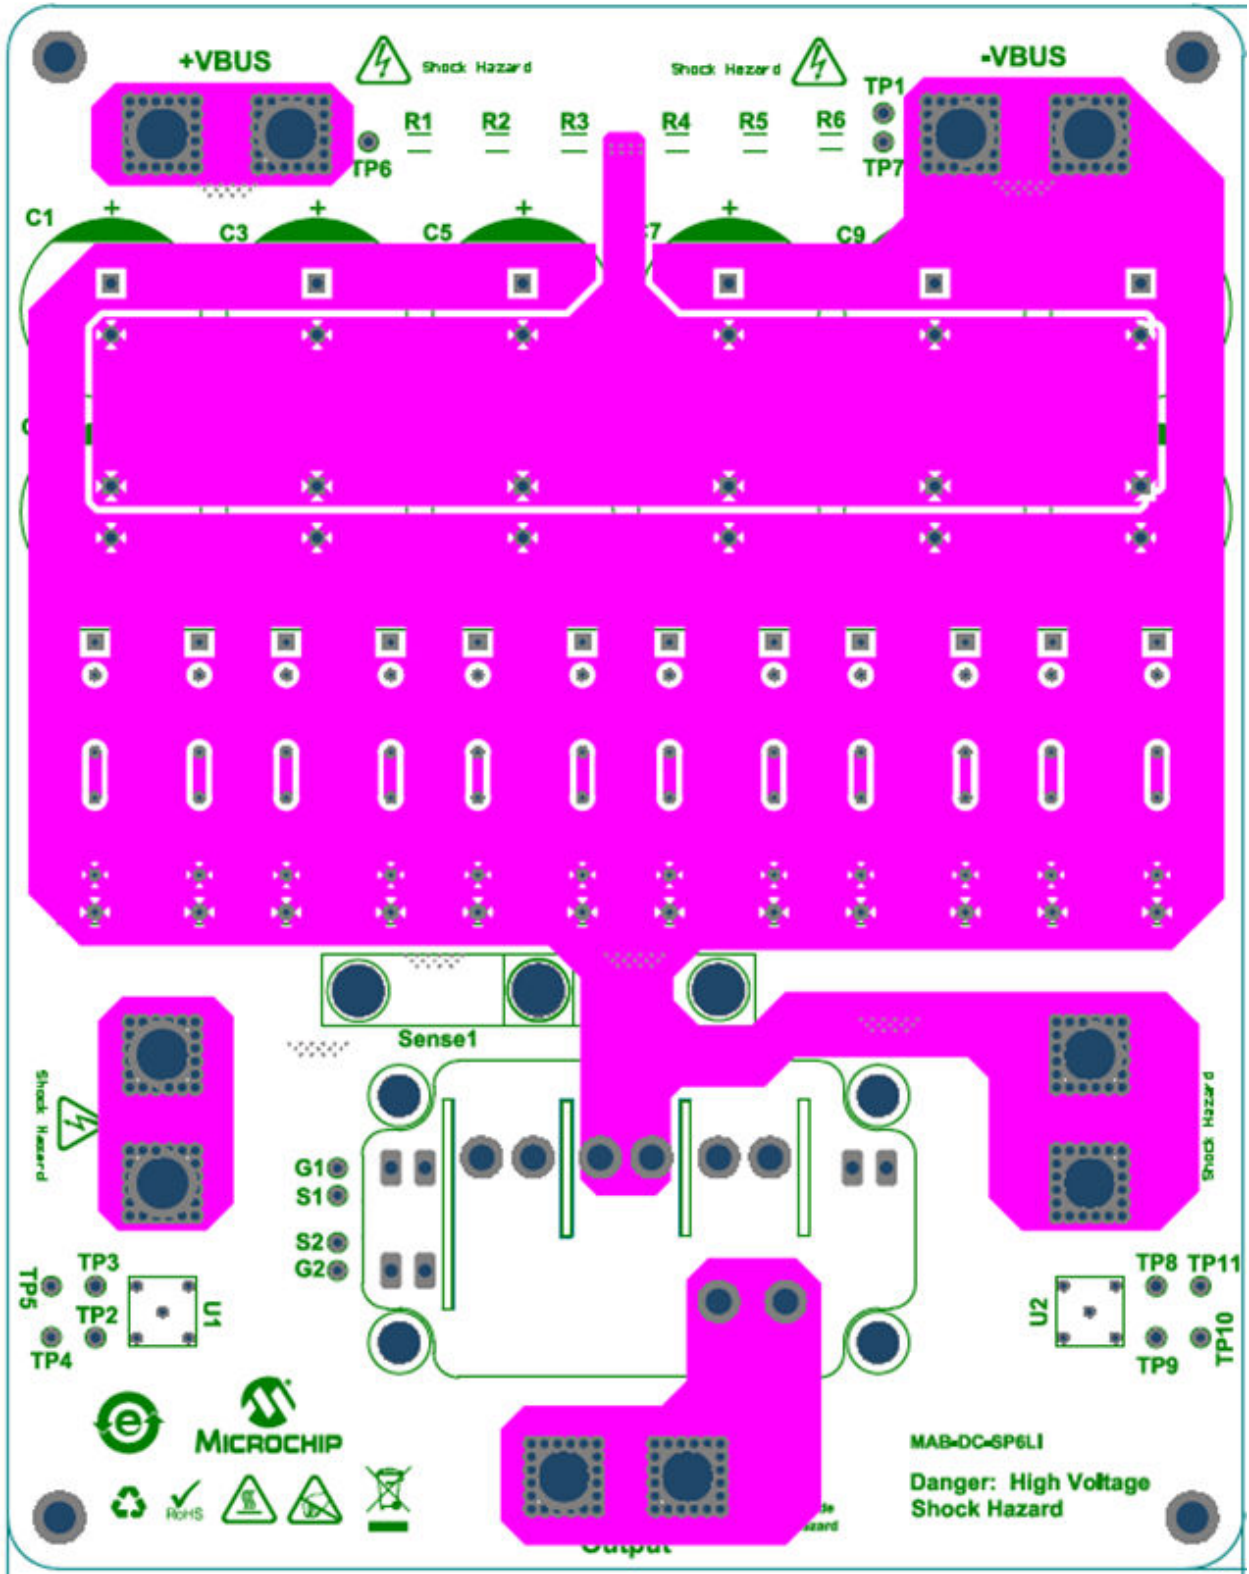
SP6LI Evaluation Board Bottom Layer
